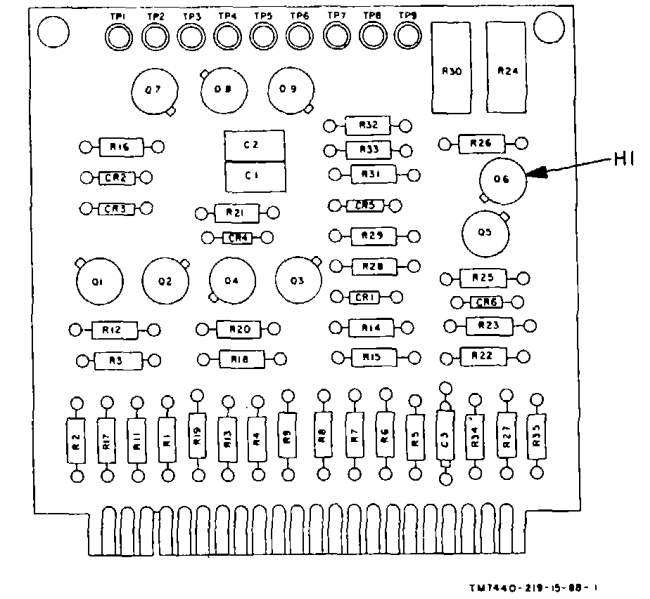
Component board assembly (+4.75 VDC) (PS1A1), component location diagram.
